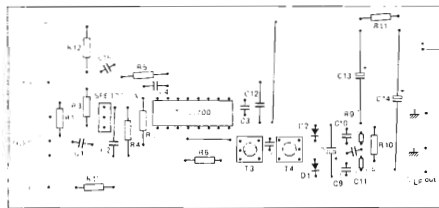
Component side of printed-circuit board (test circuit Fig. 6).
